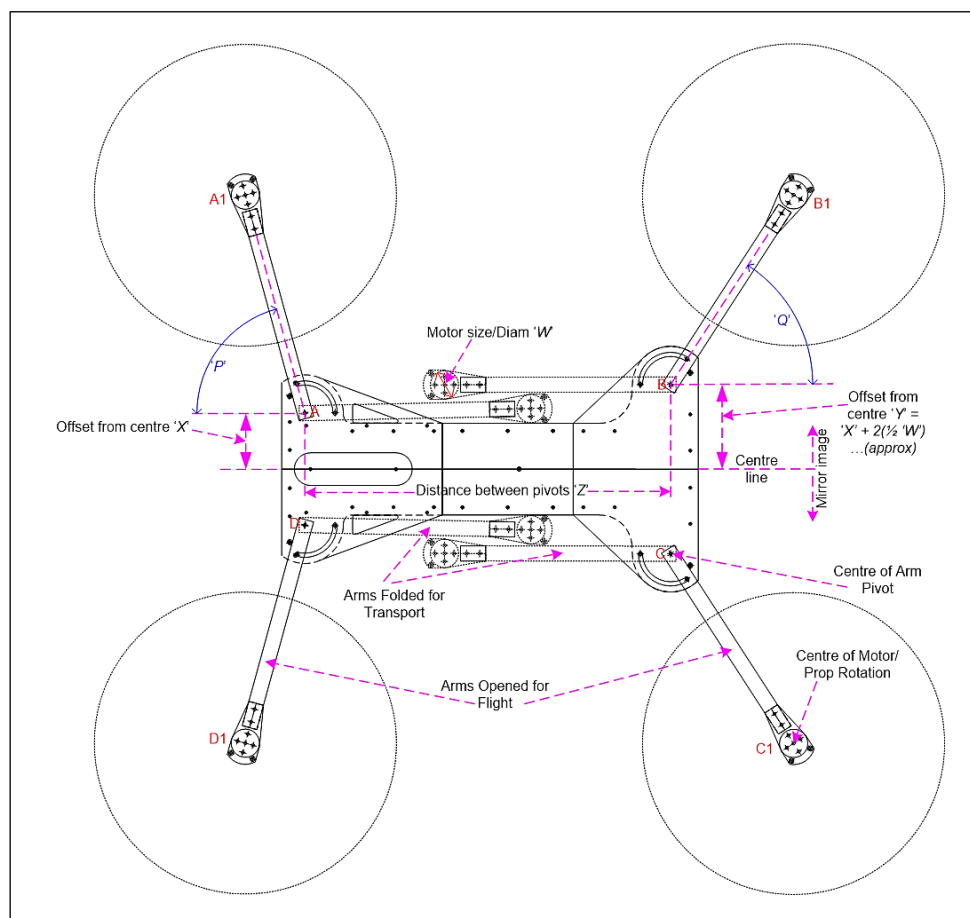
Explanatory Drawing 1 provided to Prof Murrell
